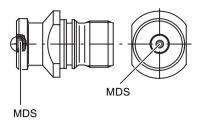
Installation example of MDS D421/D521/E623 in a stud bolt
